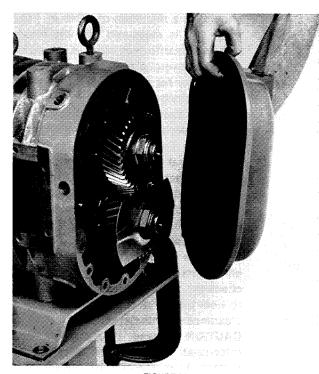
ASSEMBLING GEAR END COVER AND GASKET TO END PLATE
